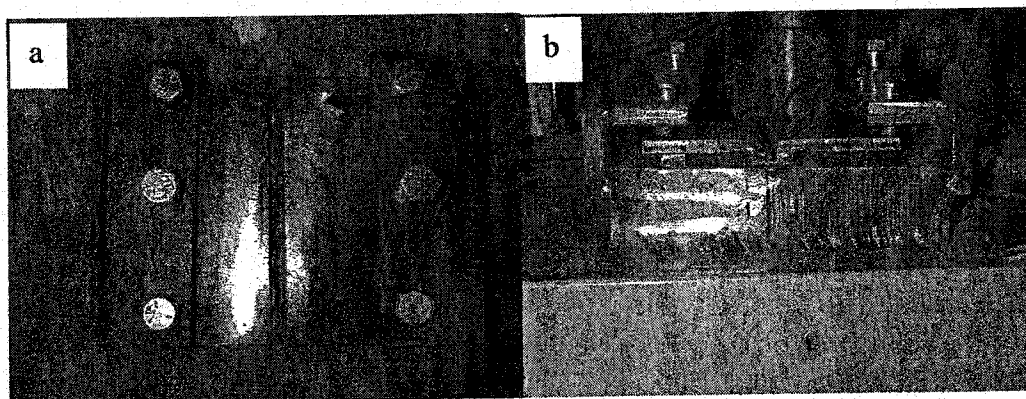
Picture of SMAW Tensile Test Set Up (a) Plan View (b) Side View
